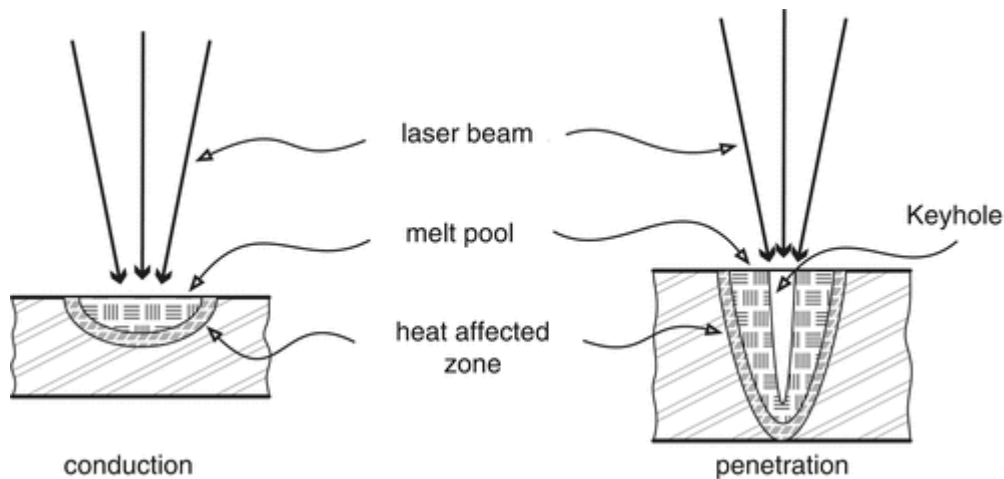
Typical fusion zone geometries for conduction-limited and keyhole welding modes (from [37]).
